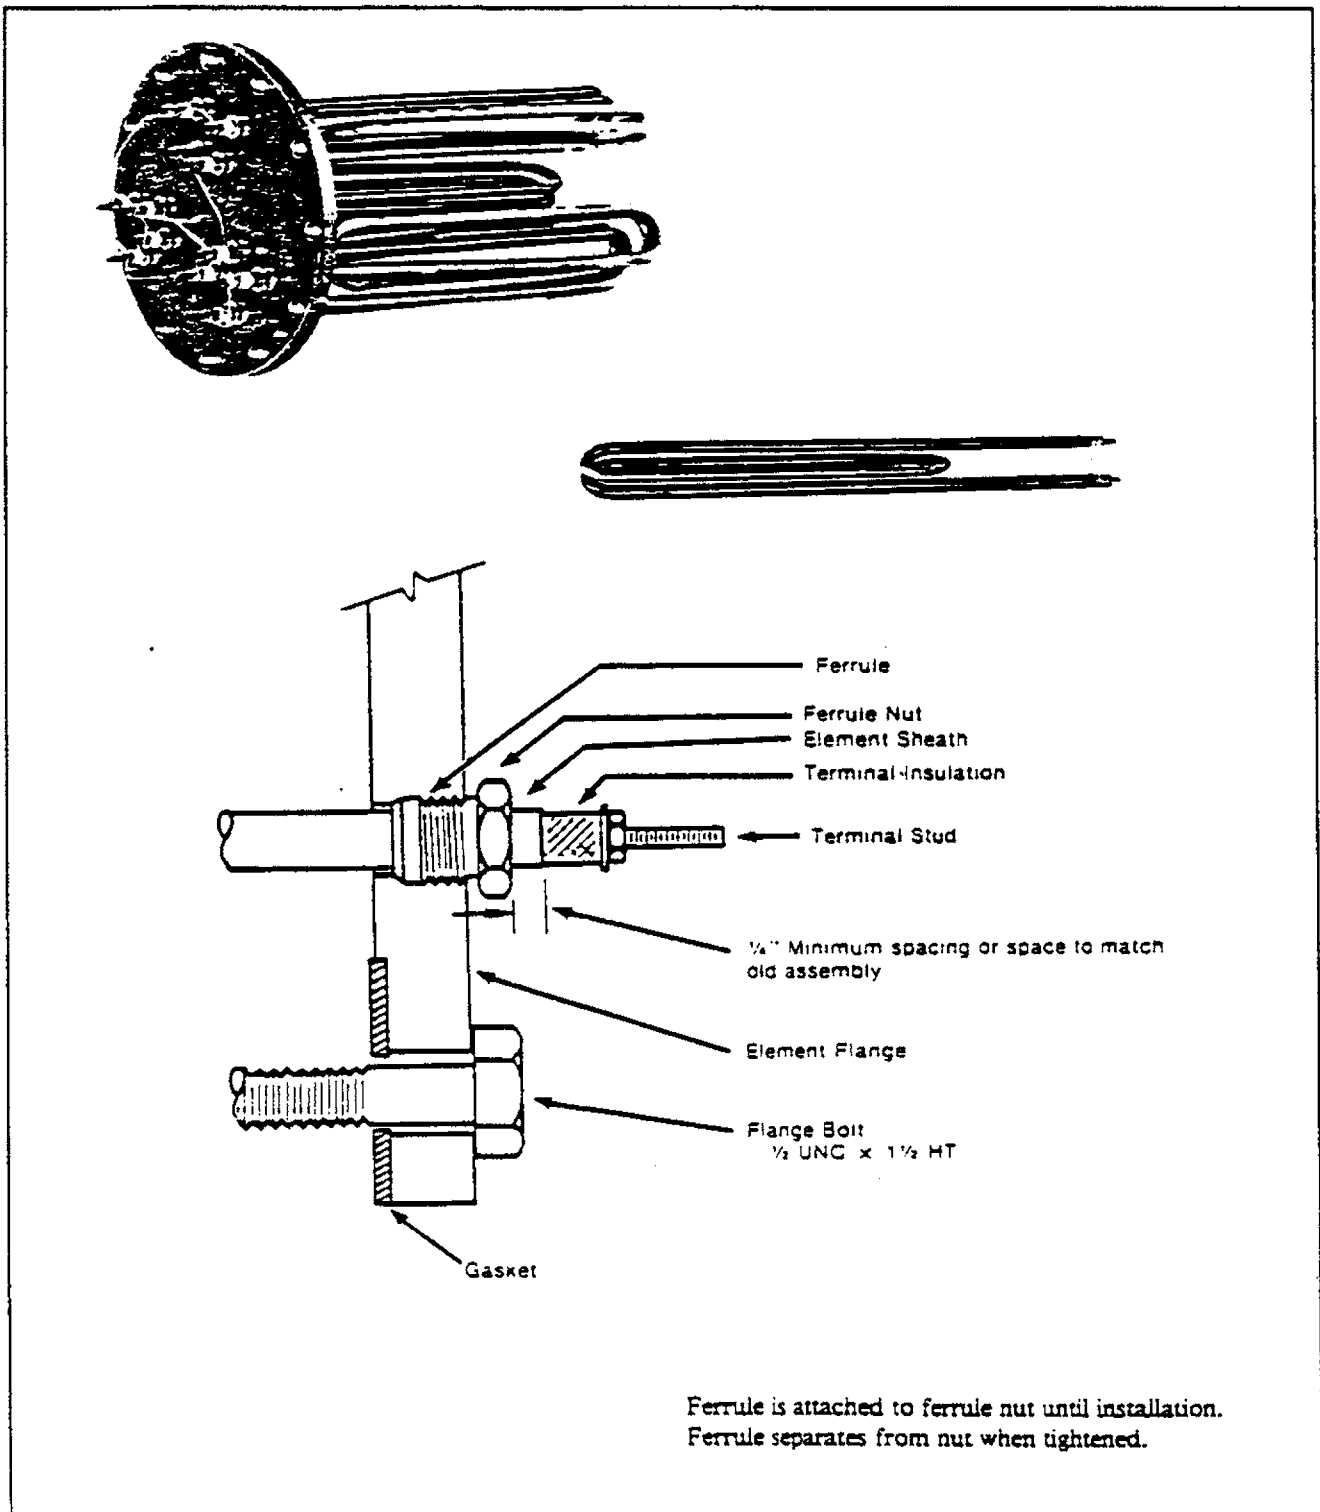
HEATING ELEMENTS AND ELEMENT INSTALLATION DETAILS
